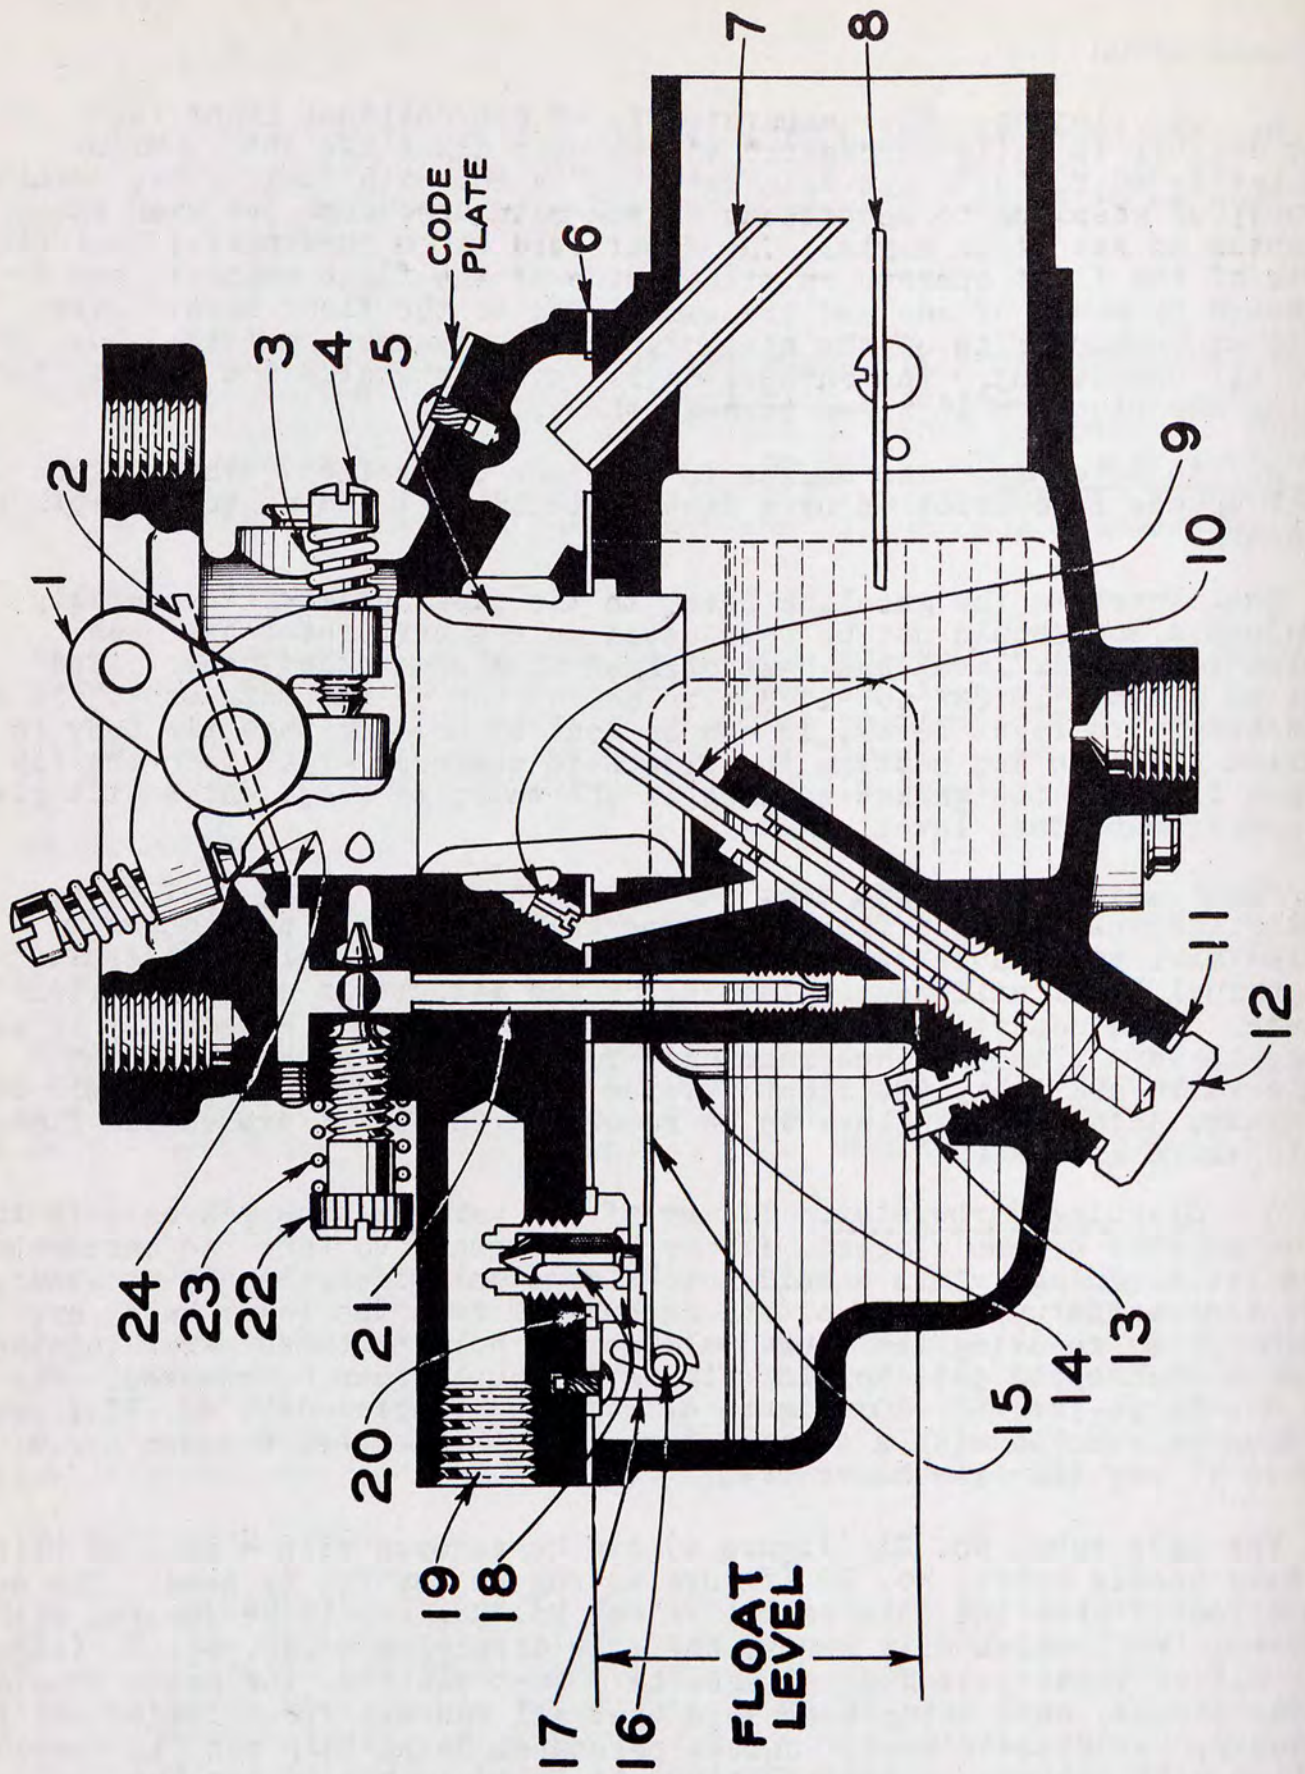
POWER UNIT PE-99-A-CARBURETOR
